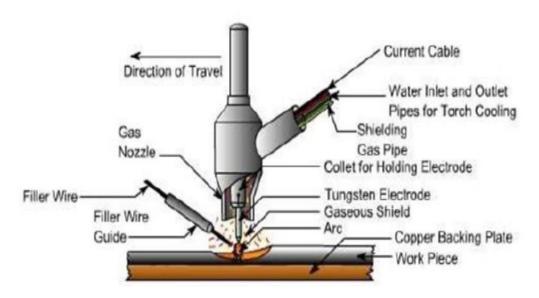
Principle Of TIG Welding System (Reference 1)
